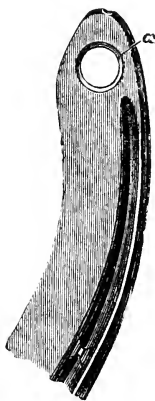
Heel of "screwed" shoe with countersunk hole.
